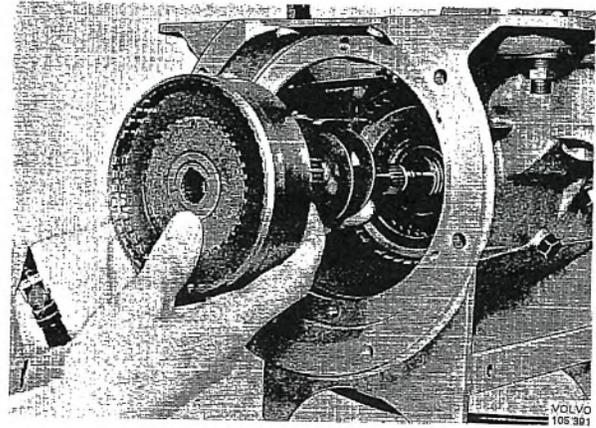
Installation sequence, front clutch cylinder thrust and backing washers
